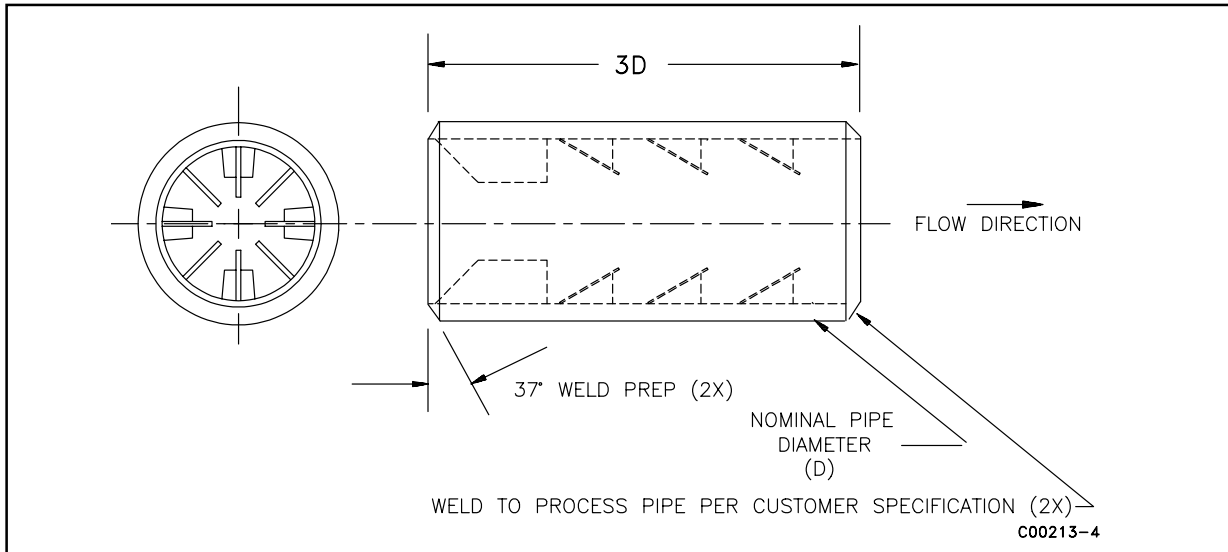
Typical Butt Weld Mounting of a VSR
